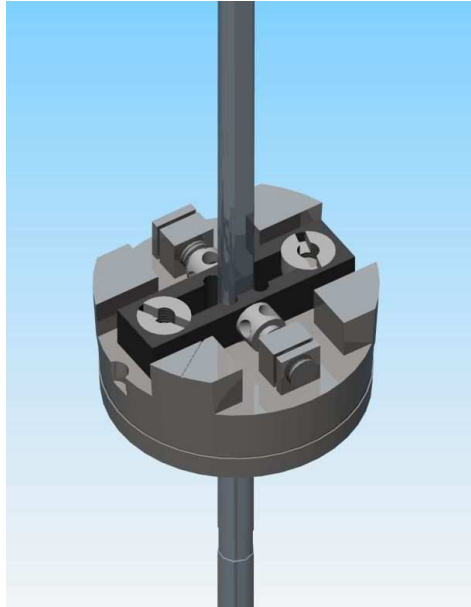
Upper bearing with Vespel® bearing insert and anti-rotation component
